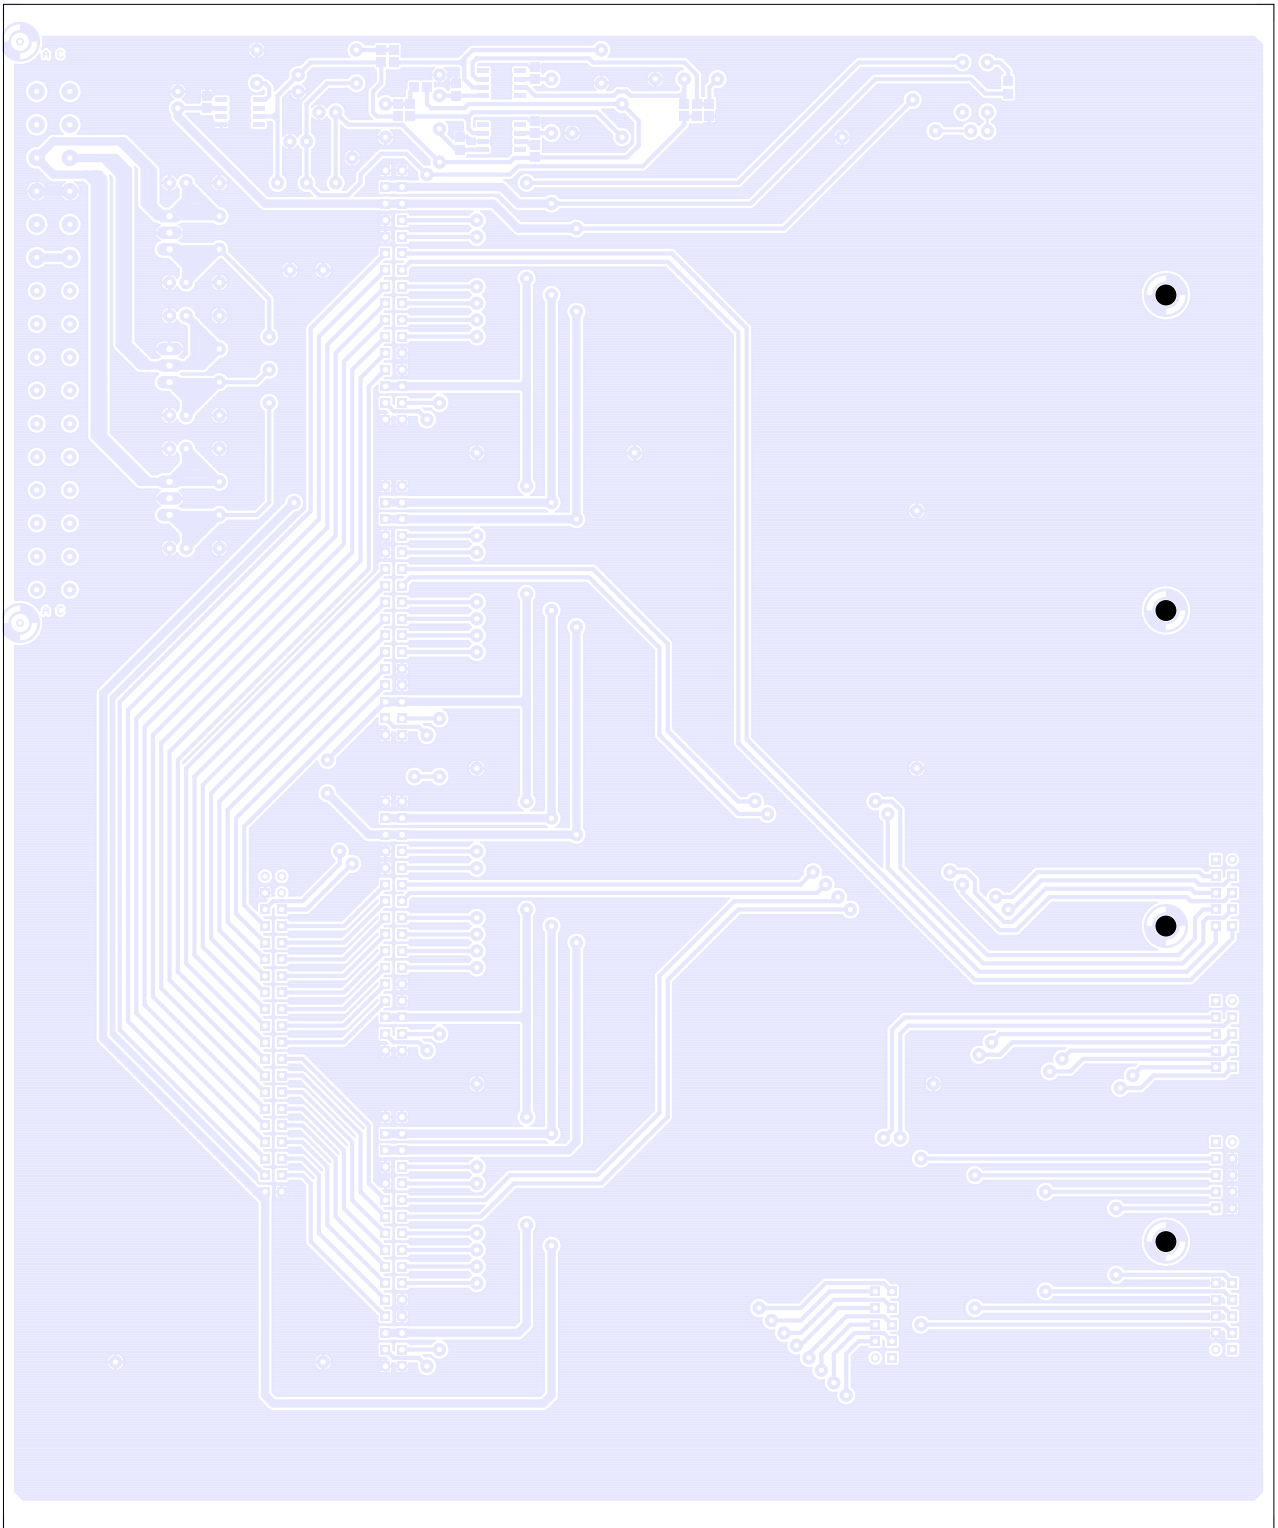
Board bottom view showing drills with 3.2 mm (0.12598 in) diameter
